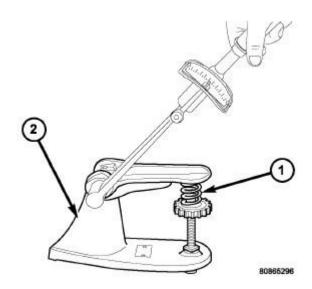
TESTING VALVE SPRING Courtesy of CHRYSLER LLC
